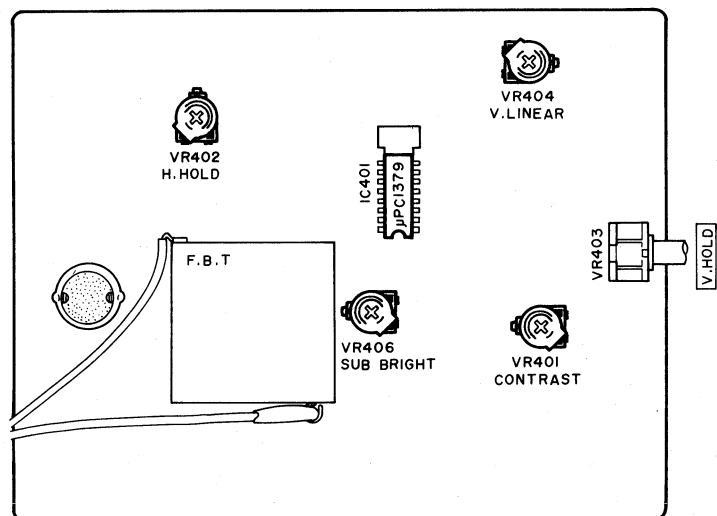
MONITOR P. C BOARD ADJUSTMENT POINT
